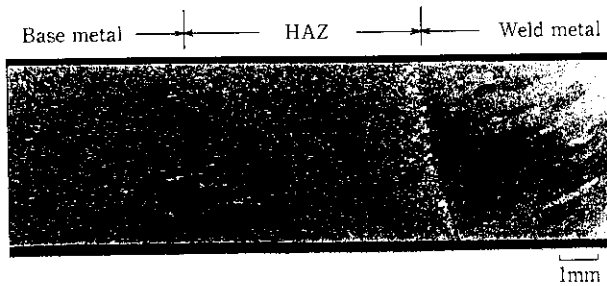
Cross section of descaled welded joint specimen after 2 week corrosion test
